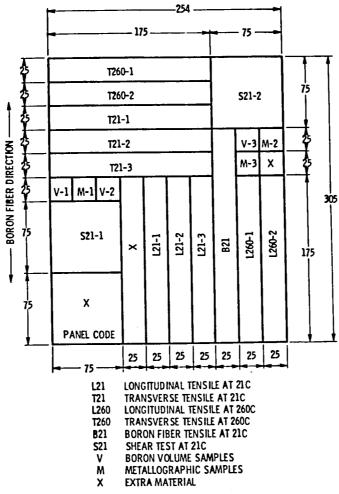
Test specimen layout for boron aluminum composite panels. (Dimensions are in mm.)
